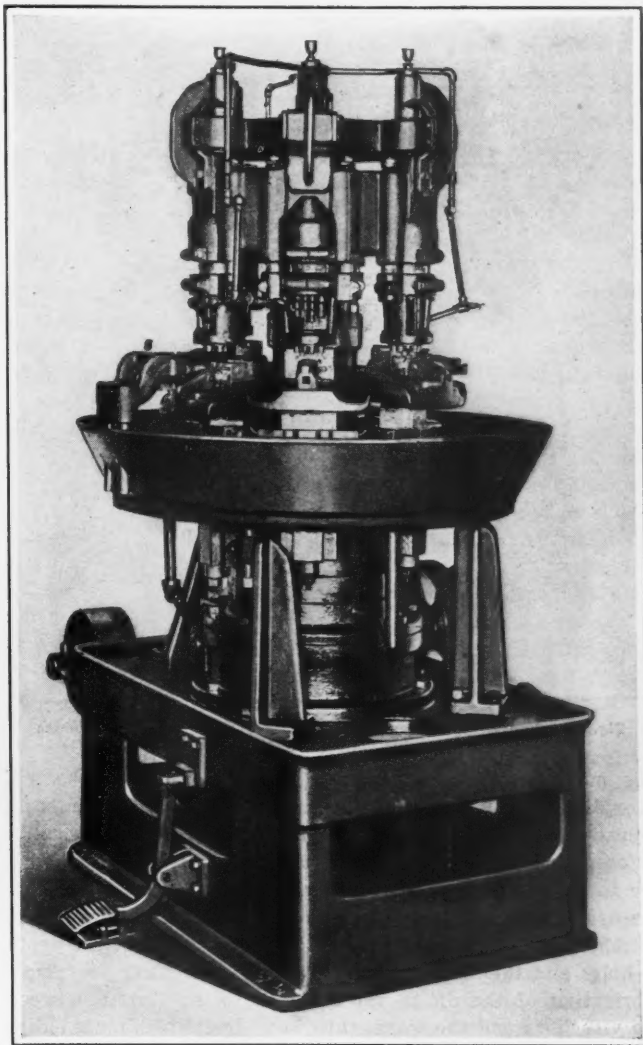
Langelier Multiple-head Drilling Machine which provides for drilling Parts containing practically Any Number of Holes without Loss of Time for Ejection of Drilled Pieces or setting up Fresh Blanks
